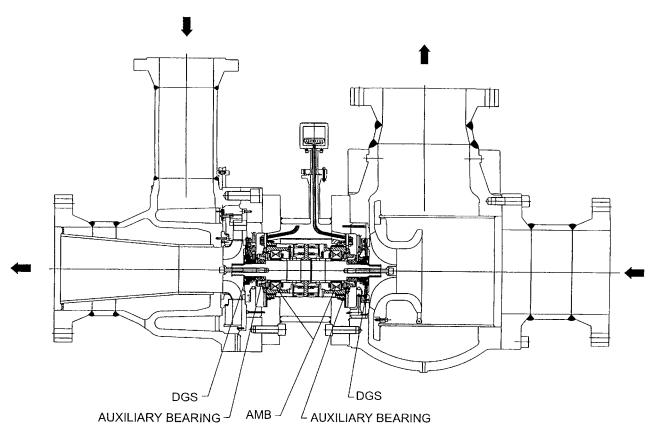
Cross-section of turboexpander compressor with AMB and DGS.
